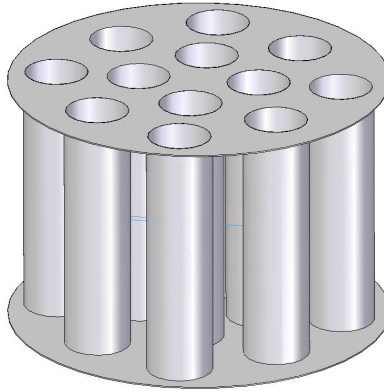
b. Insert with 12 pieces of $\text{\O}50$ mm tubes
